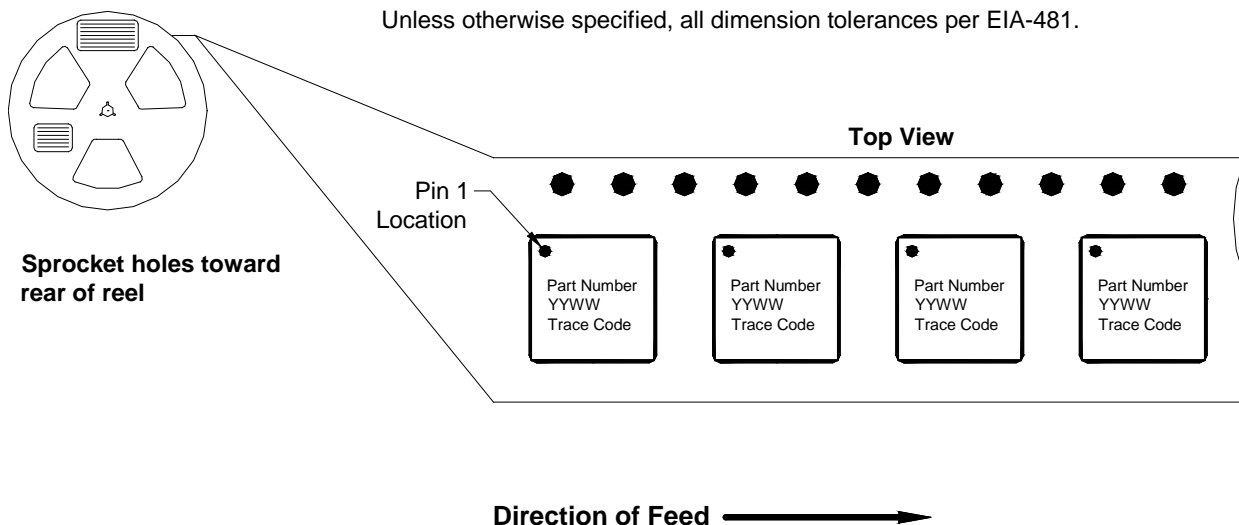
5mmx5mm (Carrier Tape Drawing with Part Orientation)
